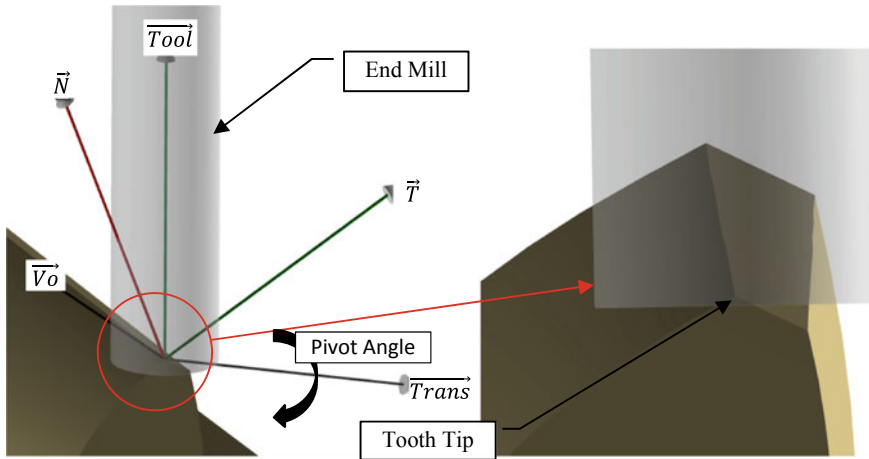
Typical End Mill installation for Tip chamfering—Spur and straight bevel gears
